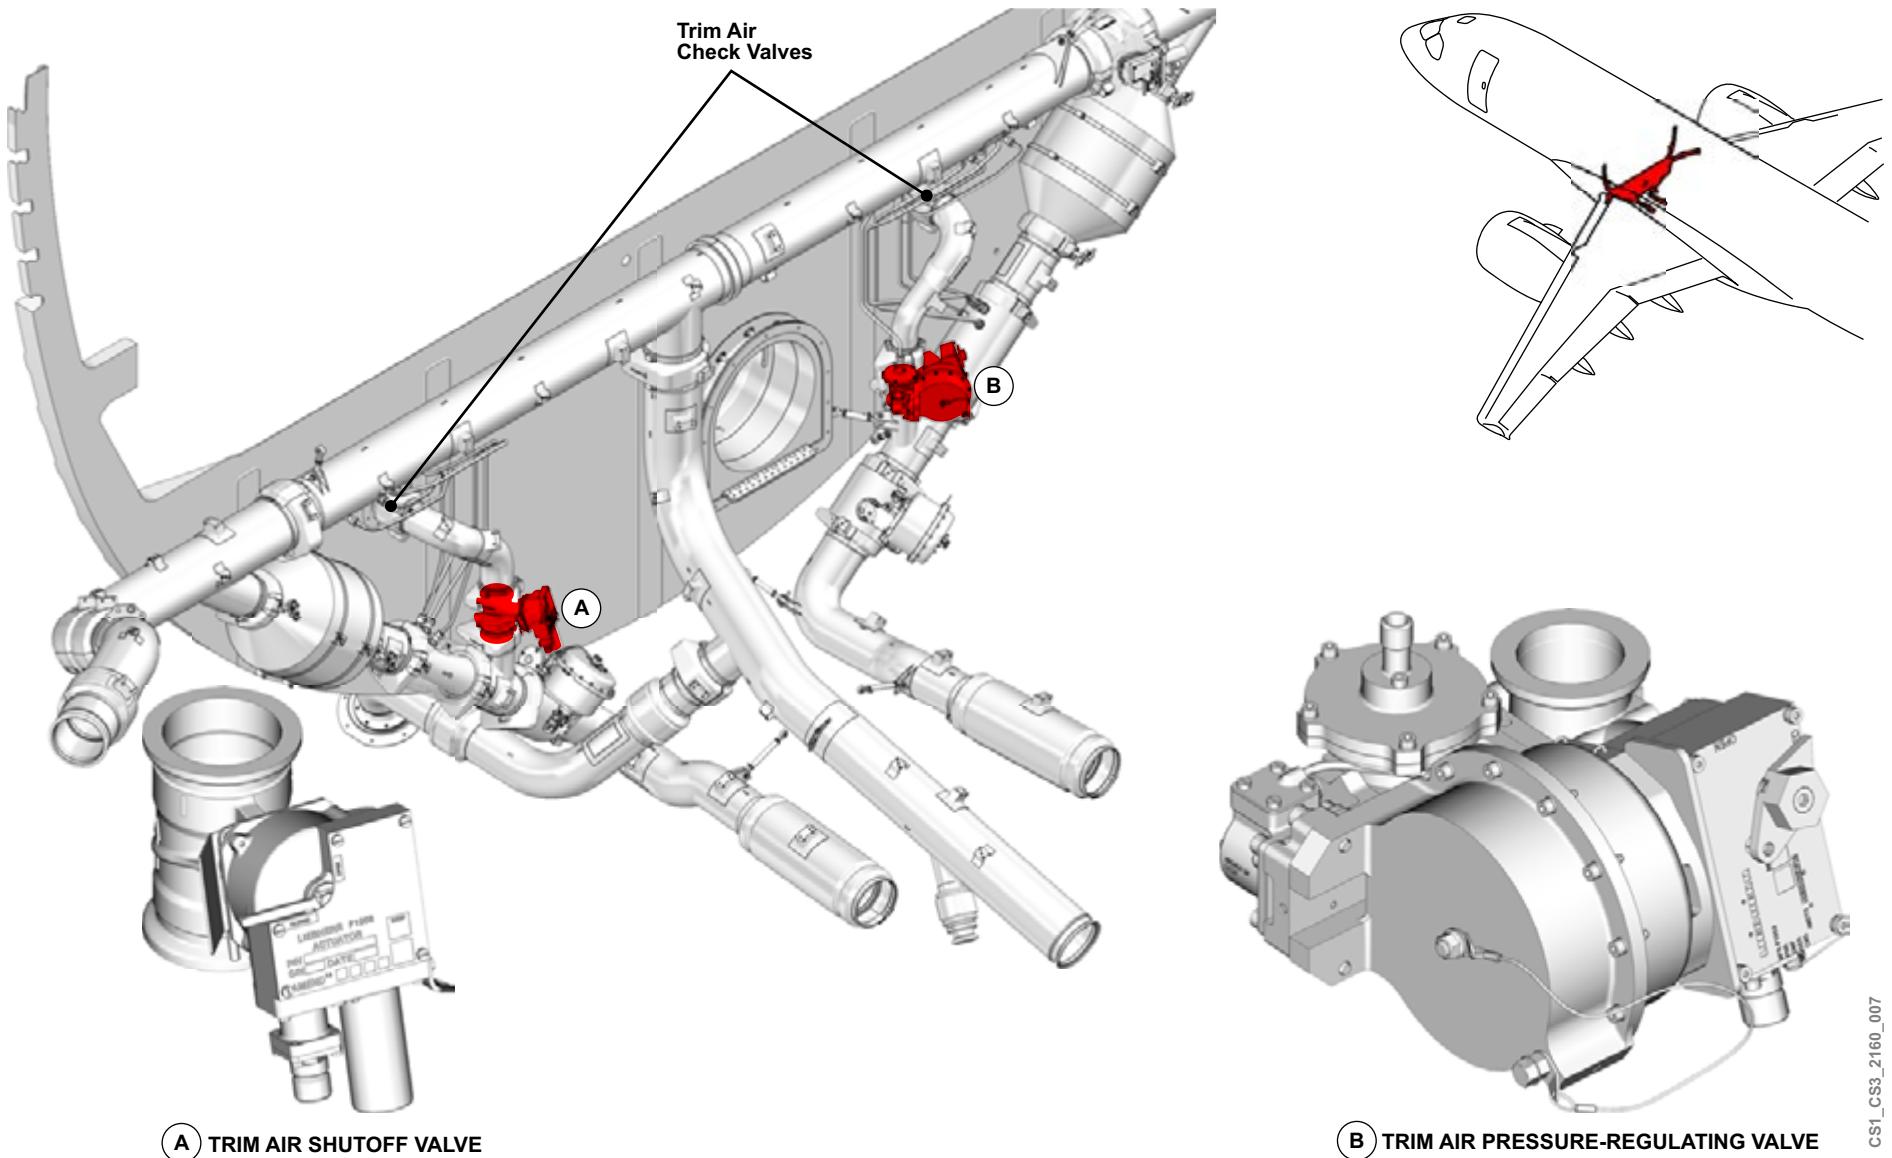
Trim Air Shutoff Valves, Trim Air Check Valves, and Trim Air Pressure-Regulating Valve Location
